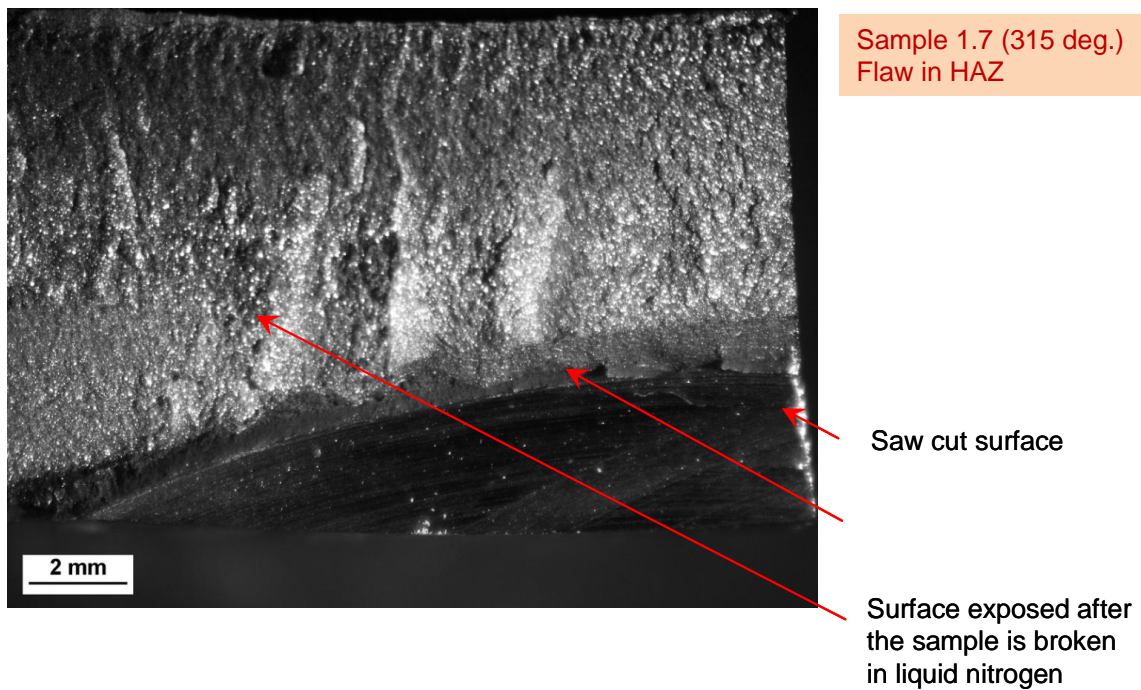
Fracture surface of a flaw located in HAZ
